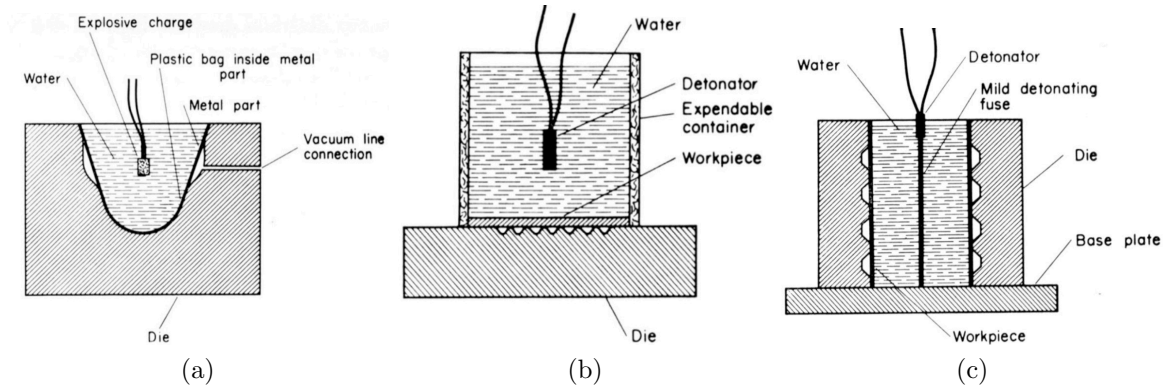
Schematic of EF process to form (a) a large workpiece into final shape (b) a flat panel and (c) a cylindrical workpiece [30].
